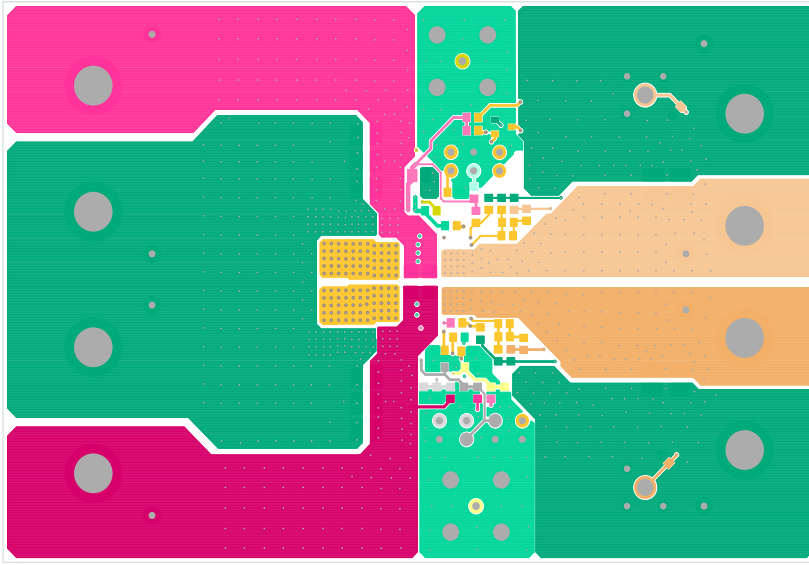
BOTTOM LAYER SOLDER SIDE
